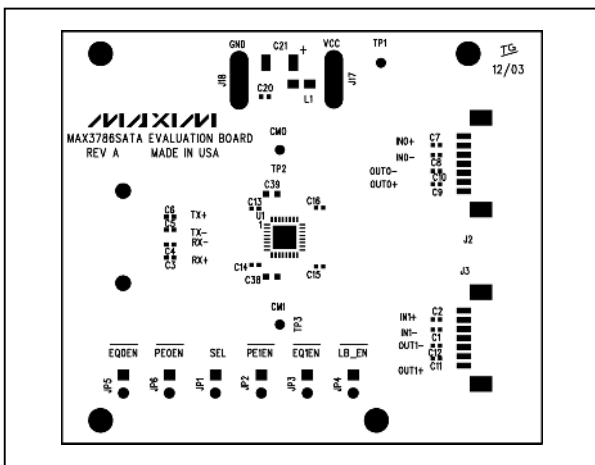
MAX3786 SATA EV Kit Component Placement Guide—Component Side
